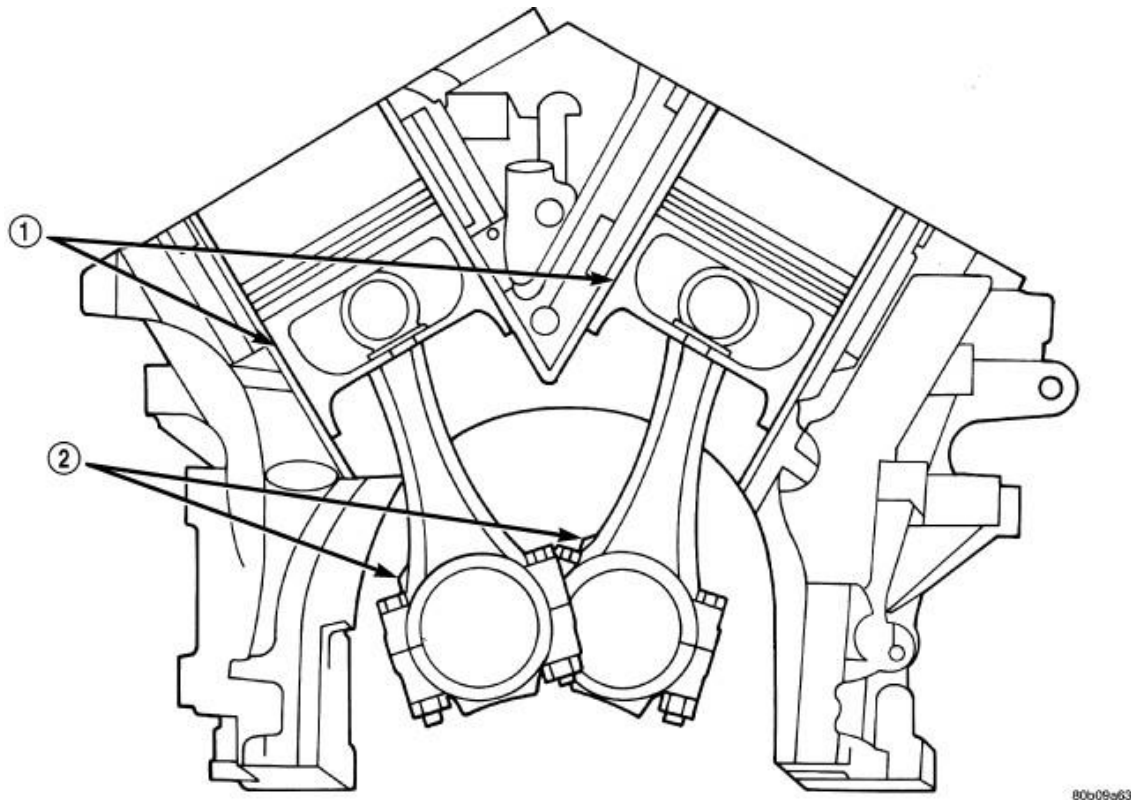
Piston and Connecting Rod Positioning (Front View of Engine)
